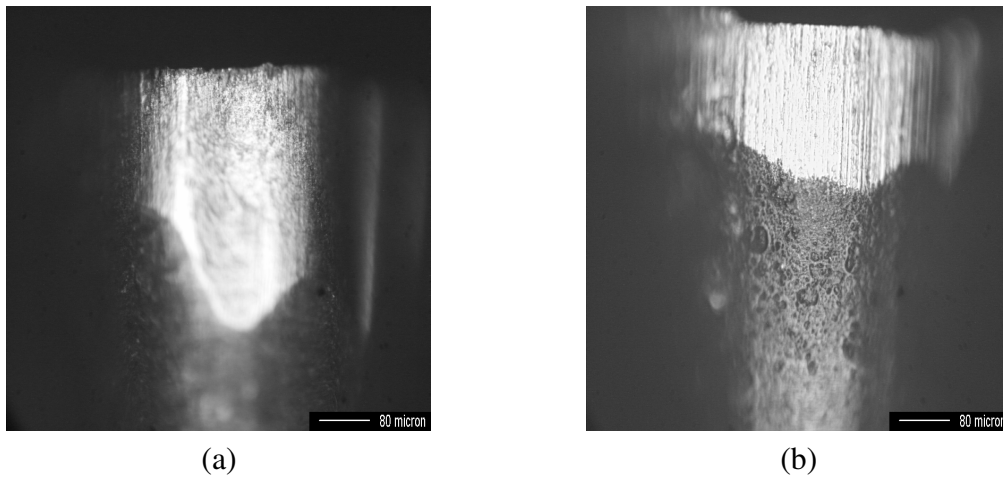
Tool flank wear conditions under dry and near dry conditions after the same time interval for condition 5. (a) Dry machining. (b) Near dry machining.
